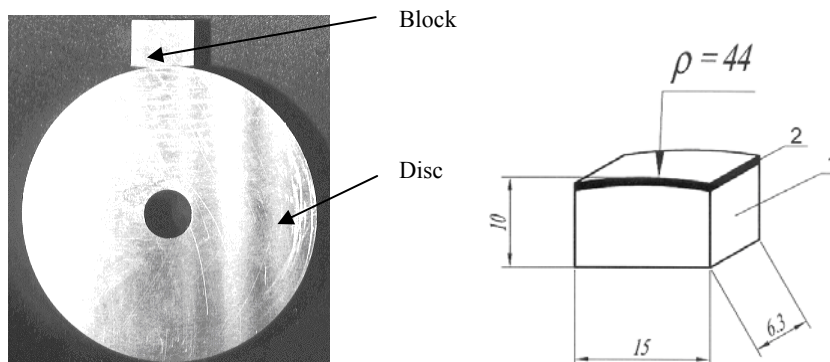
Samples tested on tribometer; dimensions in mm (1–filler metal, 2–hardfaced layer; ρ –tooth-curve radius).
